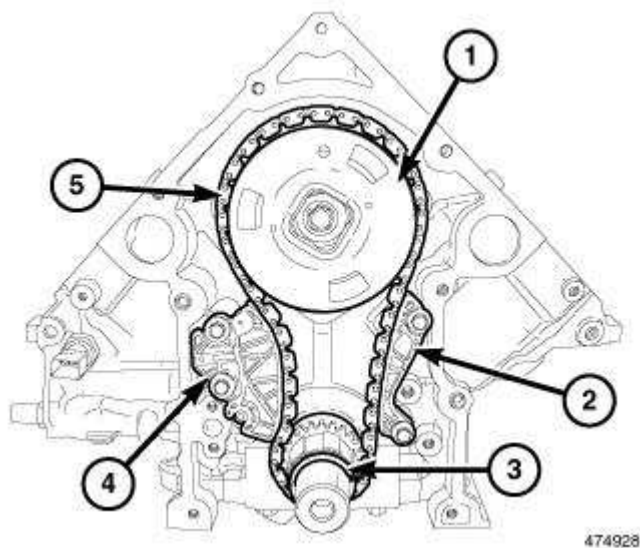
Timing Chain, Sprockets, Timing Chain Tensioner & Guide
